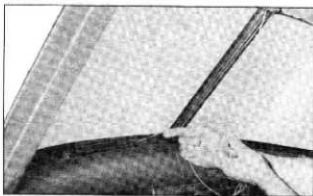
Raising Inner Lip of Channel Over Pinch-Weld
